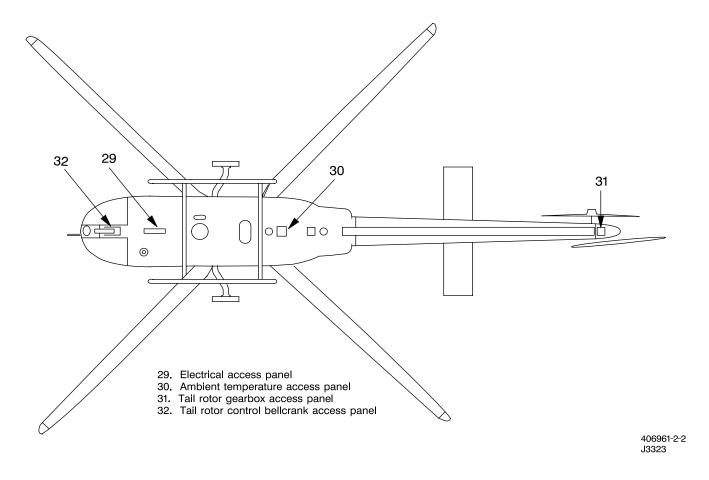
Access and Inspection Provisions (Sheet 2 of 2)
